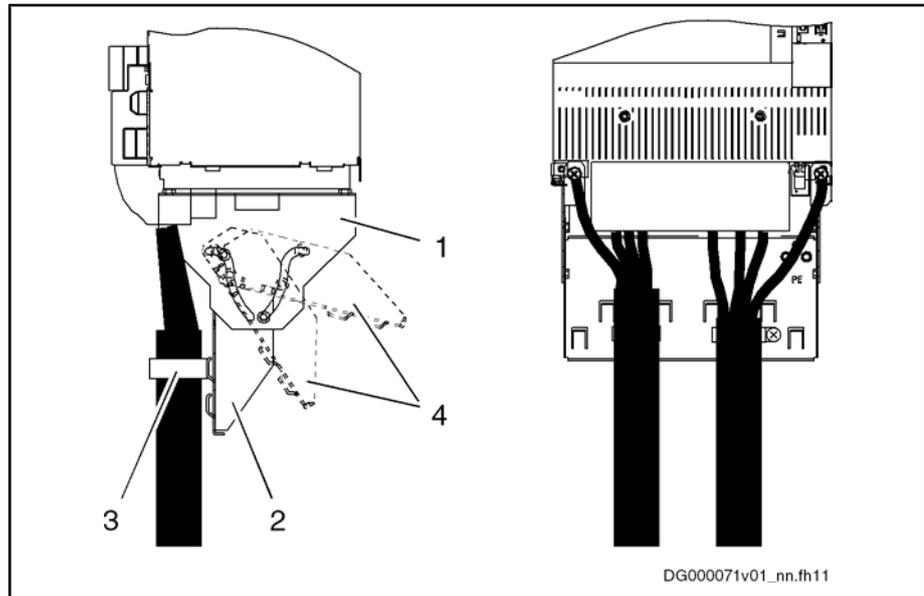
HAS02.1-005 at bottom of drive controller HCS03.1E-W0100 / 0150
